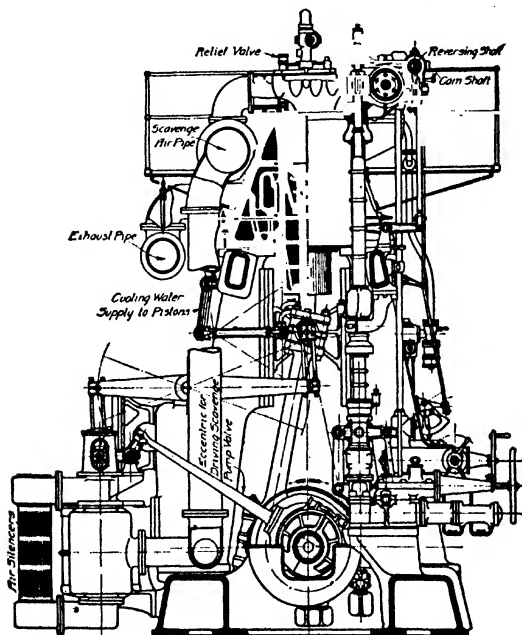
1300 I.H.P. Carls Two-Cycle Diesel Engine of Single-Screw Motor Ship "Evestone"
